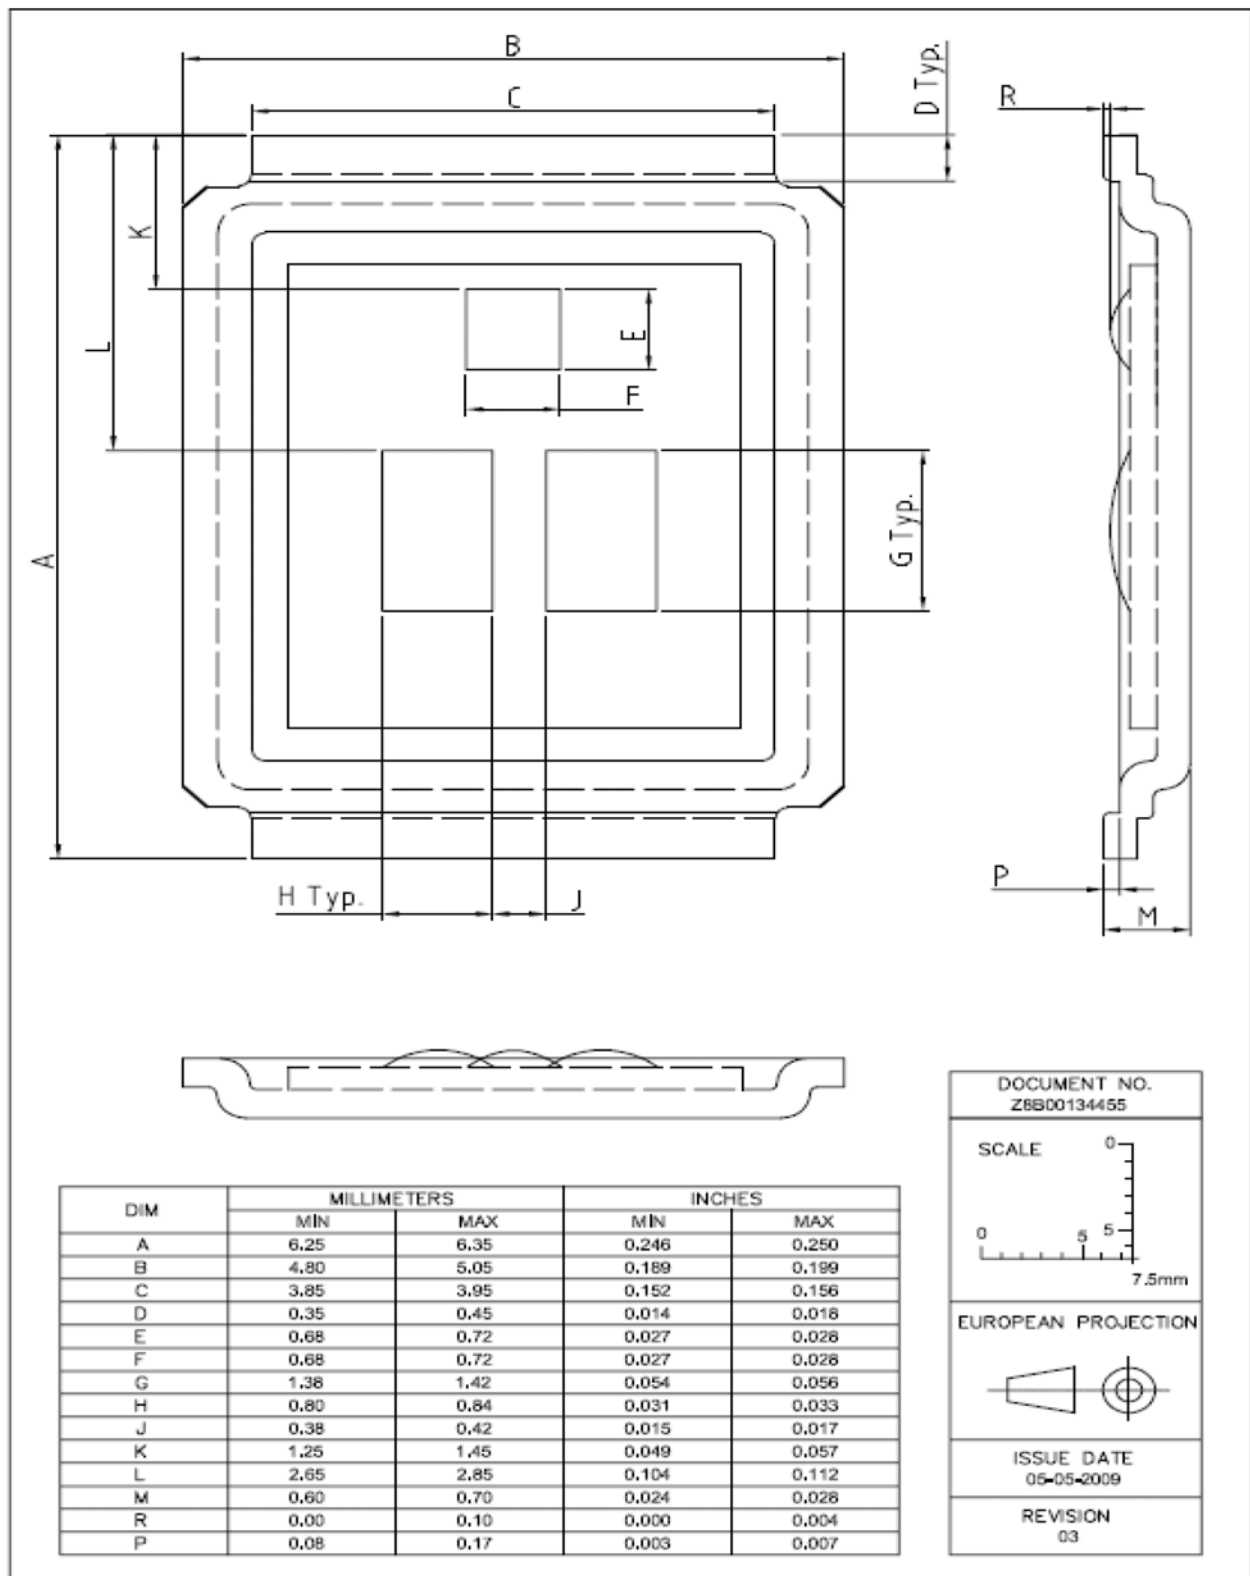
Outlines MG-WDSO-2, dimensions in mm/inches
